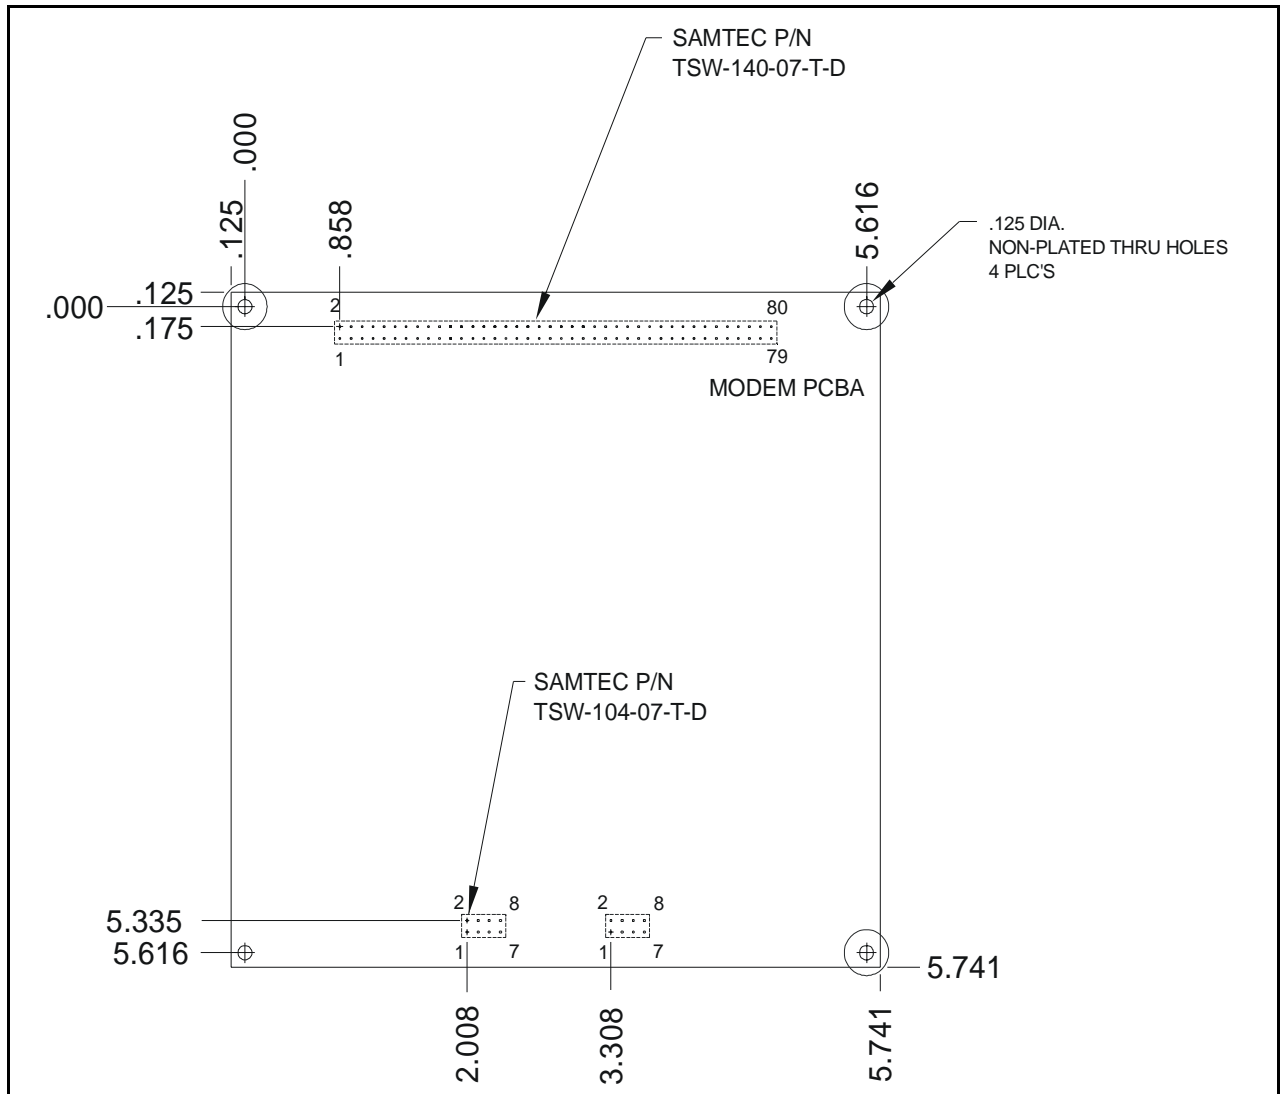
Modem PCBA Mechanical Dimensions (Top View)
